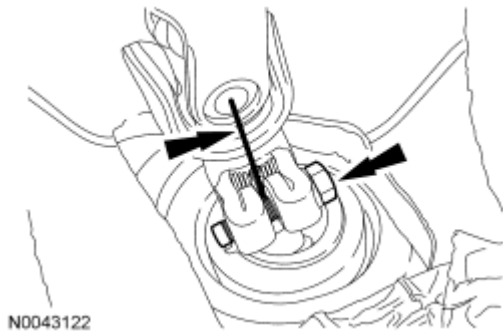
Locating Steering Column Shaft Index Mark And Bolt
